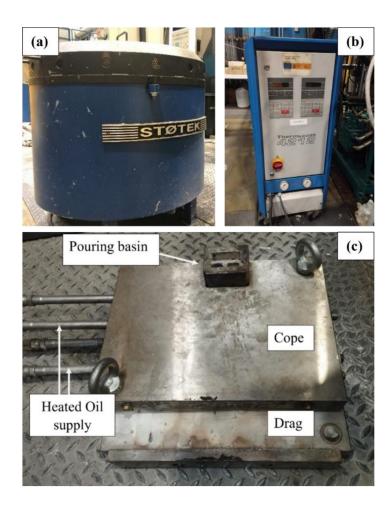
Main components for fluidity evaluation (a) electric resistance furnace (b) heating oil unit (c) experimental mould
